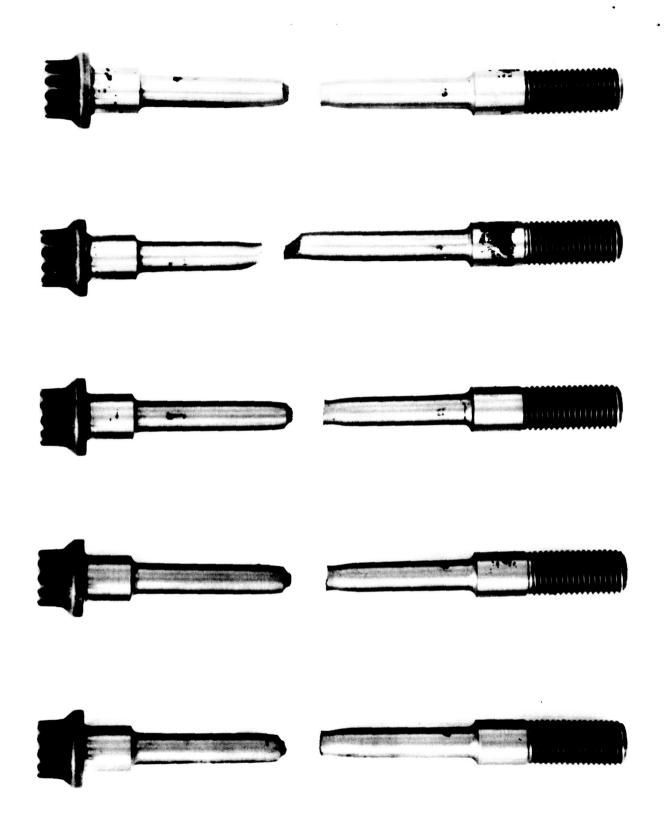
B A-286 REDUCED SHANK BOLT SPECIMENS TESTED AT -100°F (-73°C)
